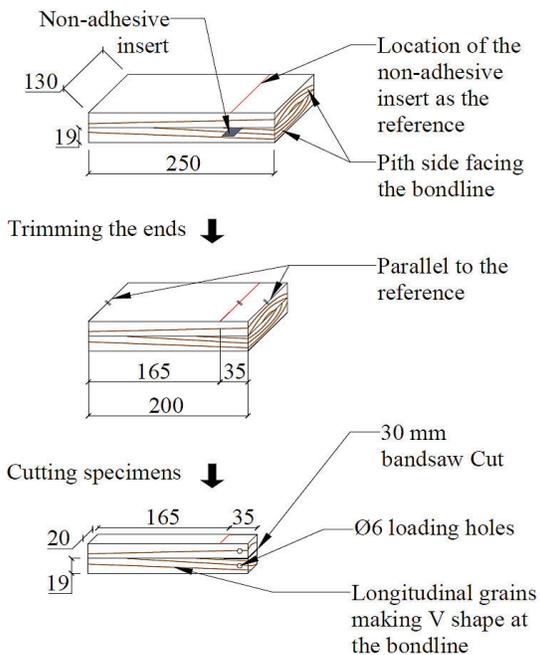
Manufacture of Mode I glued laminated wood specimens in New Zealand. Dimensions are given in mm.
